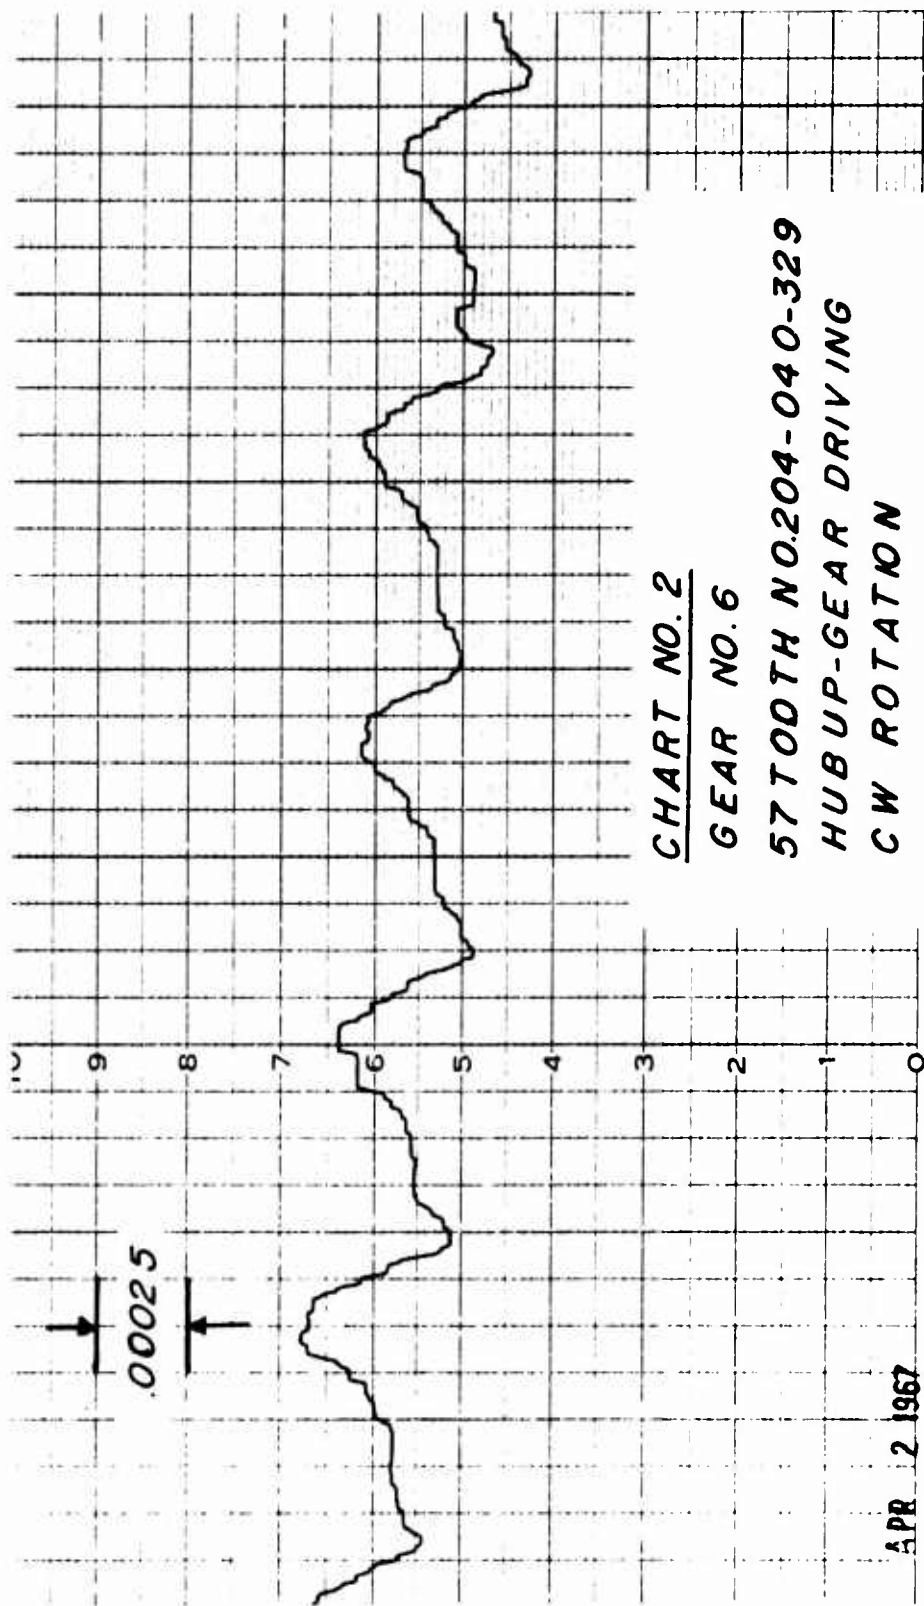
Portion of the Composite Gear Measurement of the Lower Stage Sun Gear as Measured on the Gear Cardiograph.
